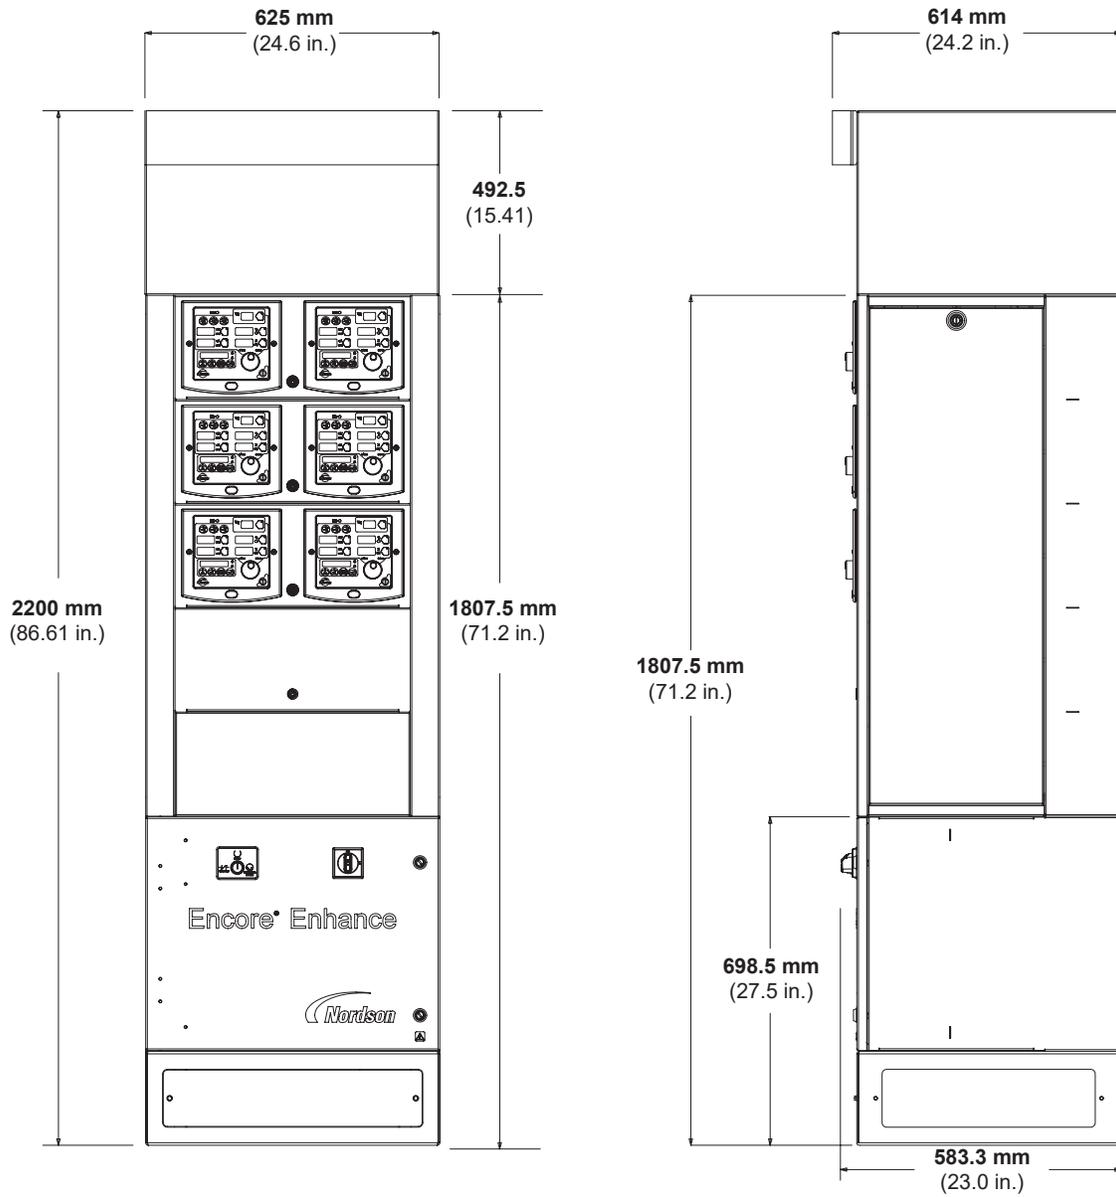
Dual Gun Controller Cabinet Dimensions (shown with optional top cover)
